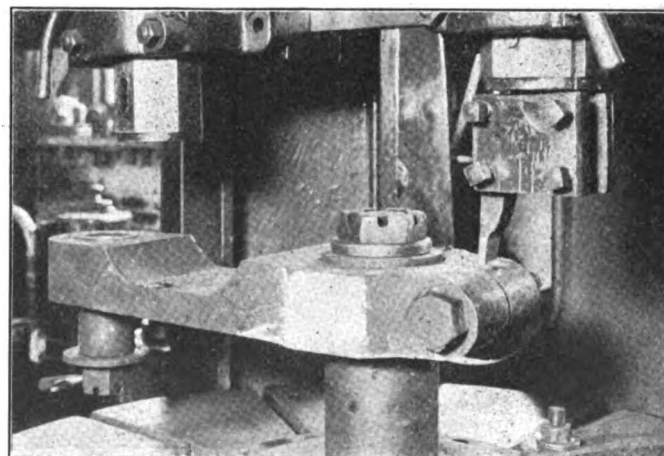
Jig for holding eccentric crank arm while facing on boring mill
